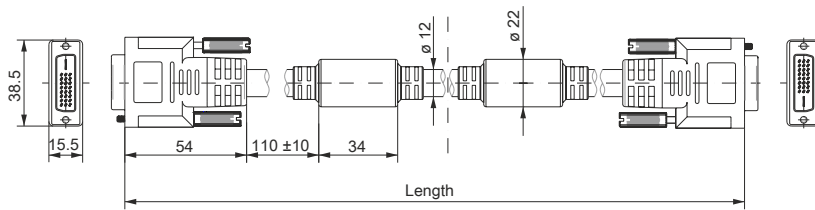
5CASDL.0xxx-03 ≥ Rev. E0 - Dimensions
